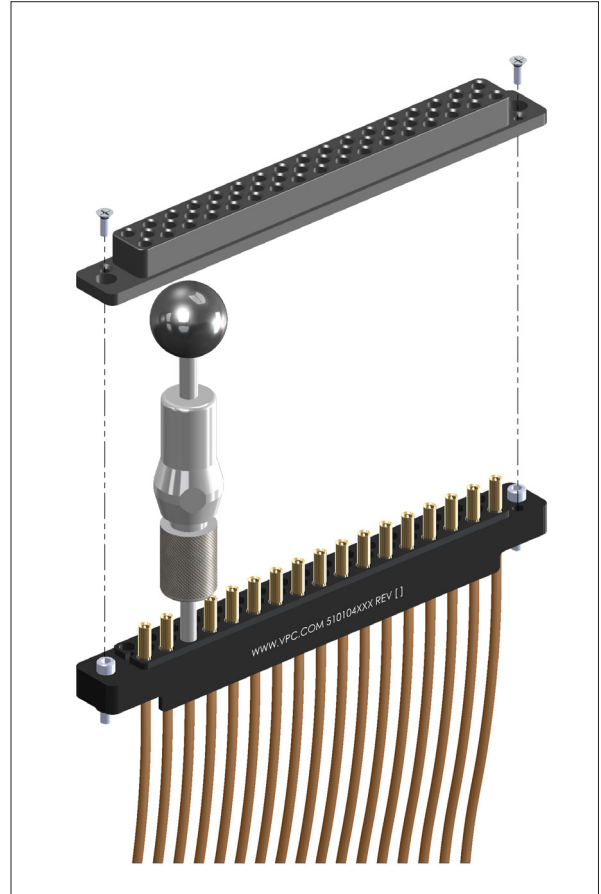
Figure A. Ensure that the tool is kept perpendicular to the module face to avoid damage to the contact or tool.
